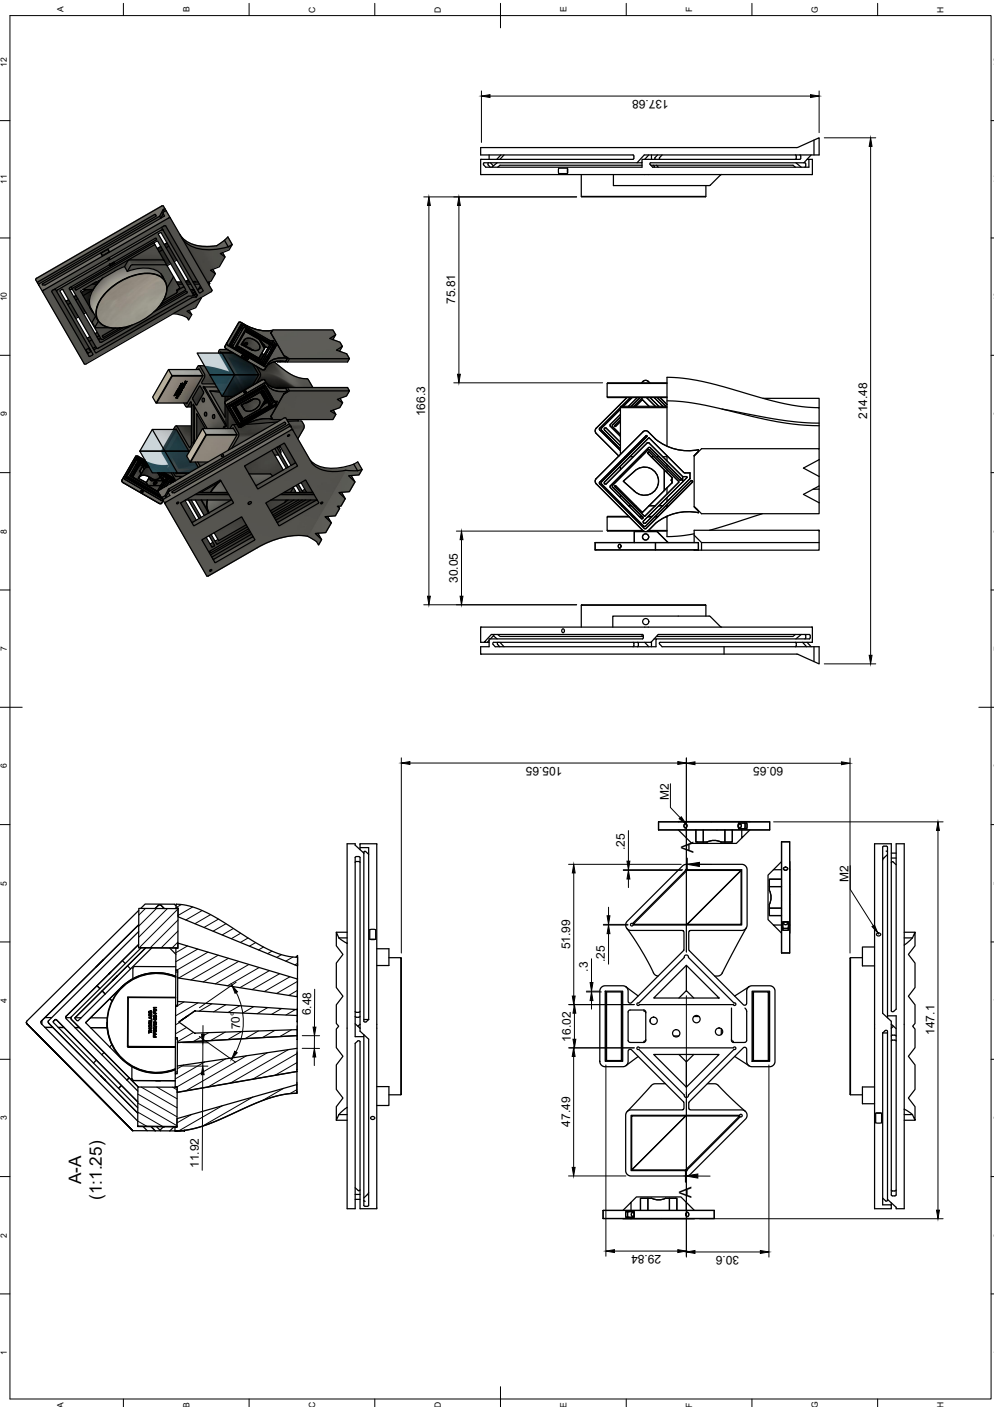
CAD drawing of the PORI with some dimensions of interest shown
